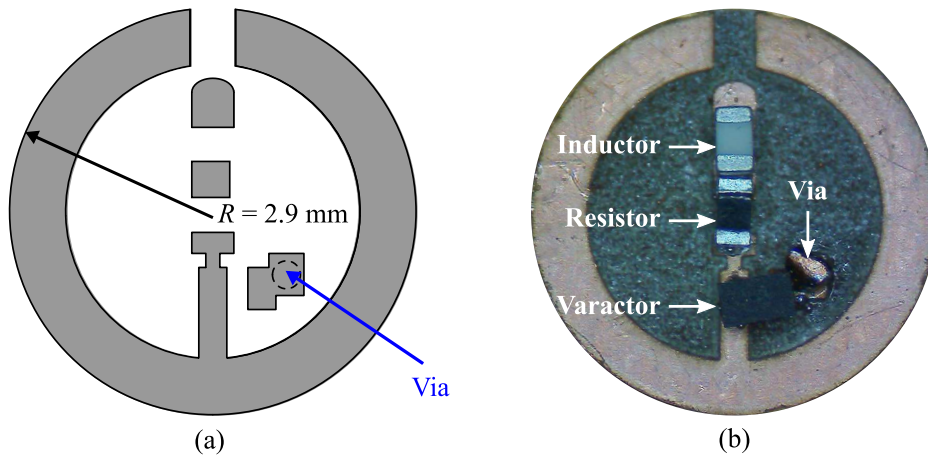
Geometry and component-loaded prototype of the circuit board. (a) The geometry and (b) a prototype with lumped components loaded of the circuit board designed for the proposed button module.
